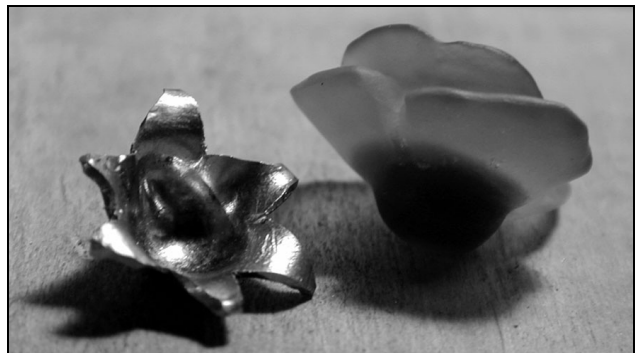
By drawing the desired shape of the cup onto the dapped sheet, it was then pierced out. A hart burr was then used to carve and shape the details. Polishing pins were efficient in the end look of the carved grooves.
